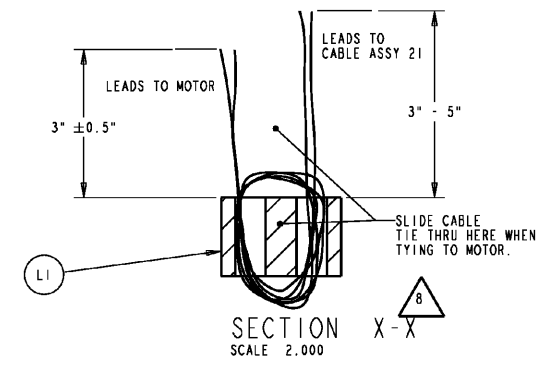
KS 271C FINAL ASSEMBLY DWG (Dwg No 300-05681-0000, Rev AJ, Sheet 1 of 1)
